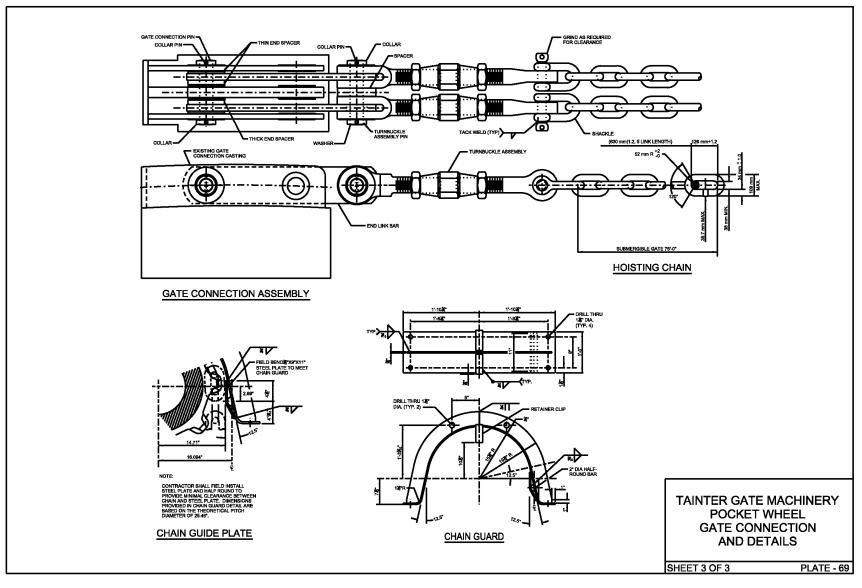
Plate 69: Tainter gate machinery, pocket wheel gate connection and details (sheet 3 of 3)
